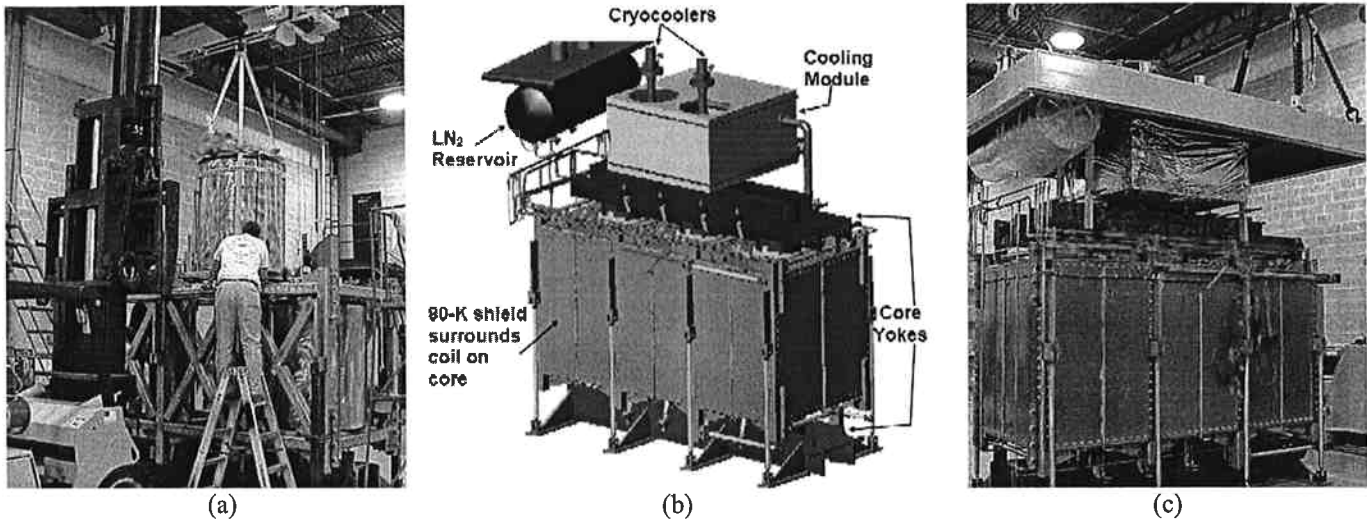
(a) Assembling coils into frame, (b) Sketch of components in 5/10MVA transformer, (c) Pre-fit of cover assembly
